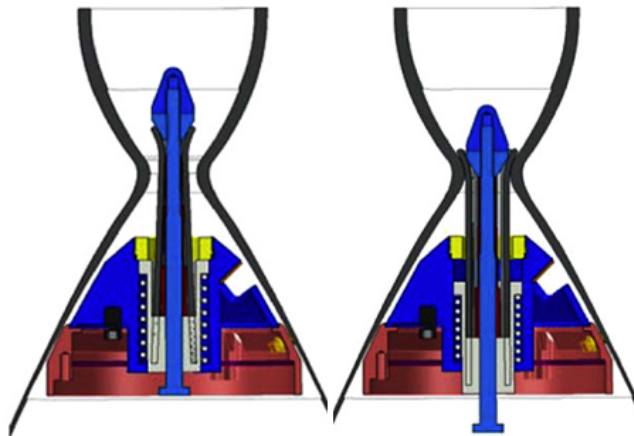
SMART-OLEV docking mechanism working principle: a probe penetrates the nozzle (left) and thanks to a shape shifting it wedges into the throat, creating a solid joint (right)
